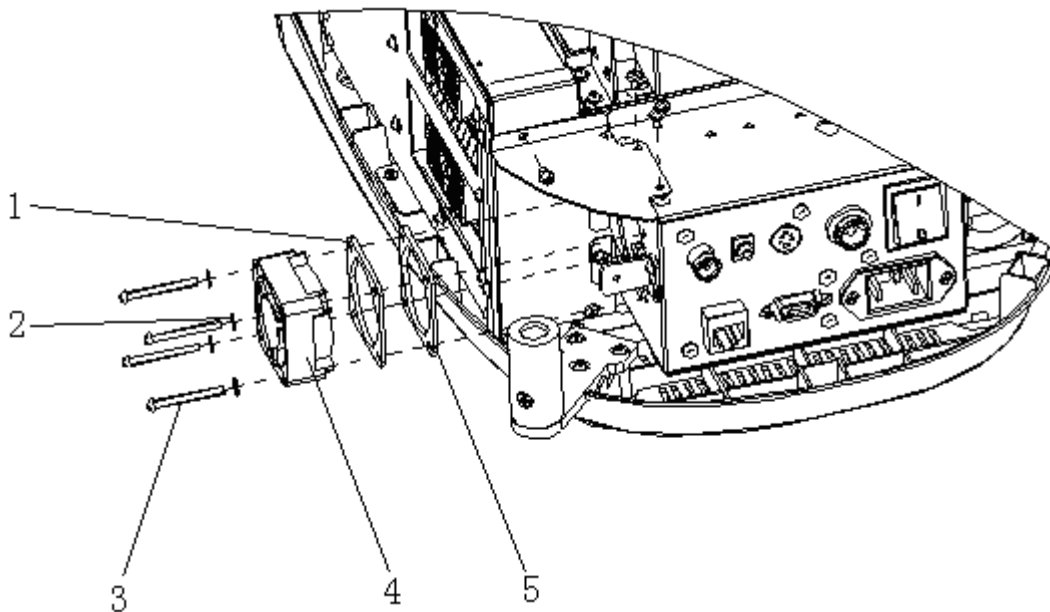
Sketch Map of Fan on Rear Board Disassembly
